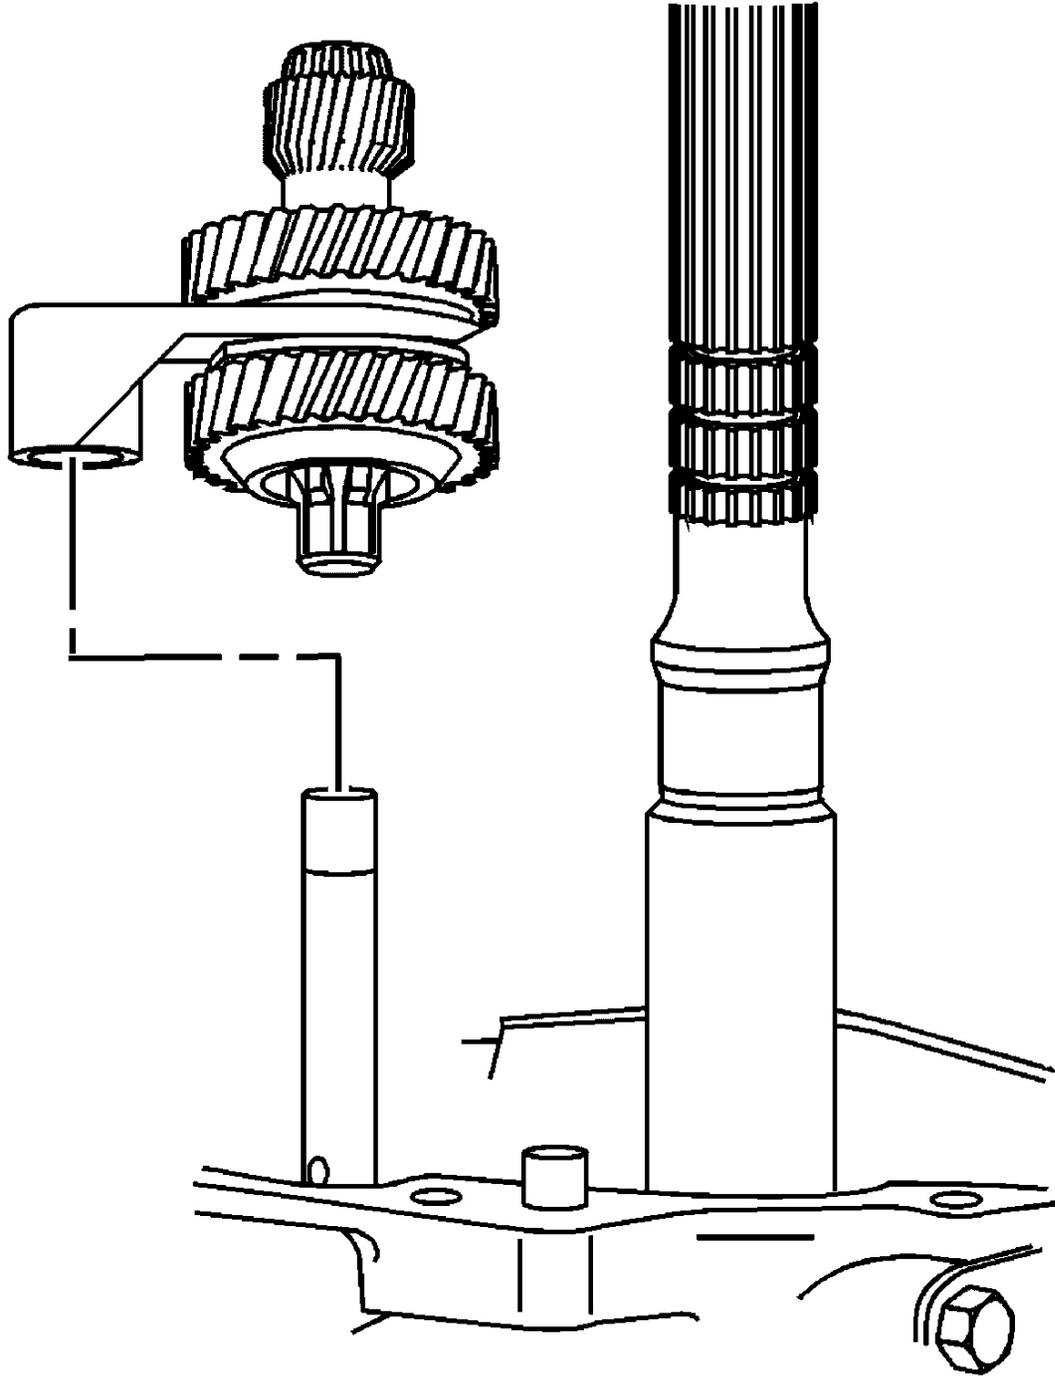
Installing/Removing Countershaft Extension Assembly & 5th/6th Shift Fork
